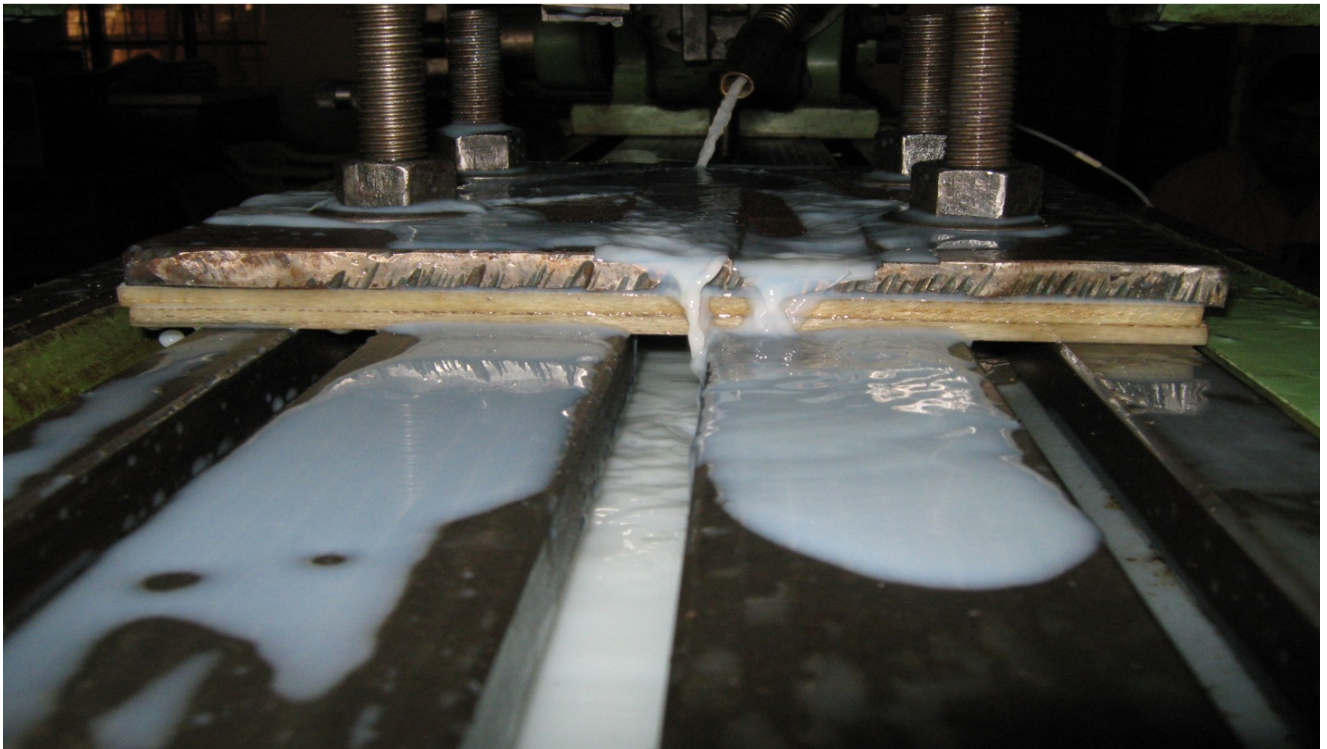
Two layers of Glass fiber epoxy bolted to the slotted table milling machine
